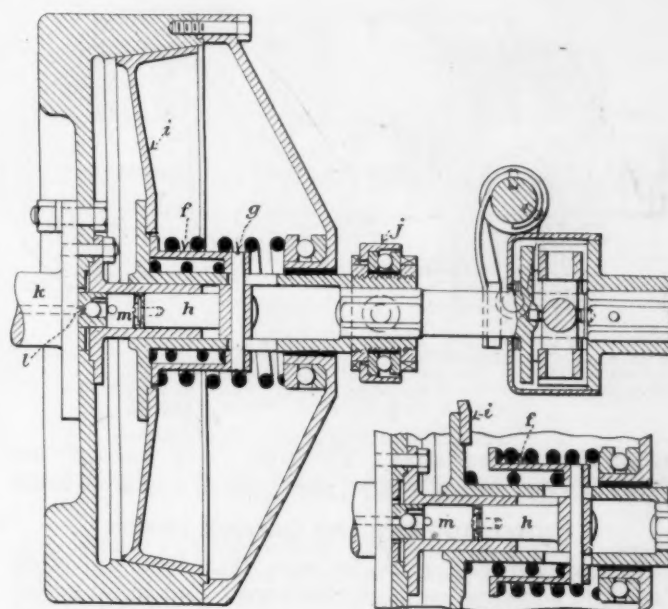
CLUTCH WITH AUTOMATIC ENGAGING DEVICE
